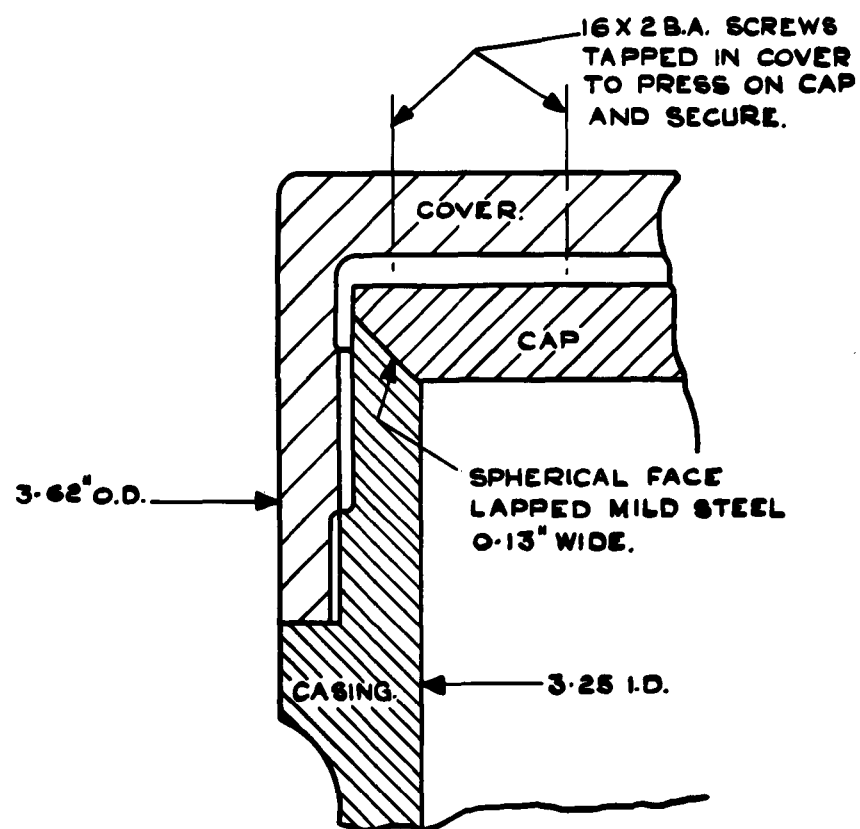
SECTION OF SPHERICAL LAPPED SURFACE SEAL.
